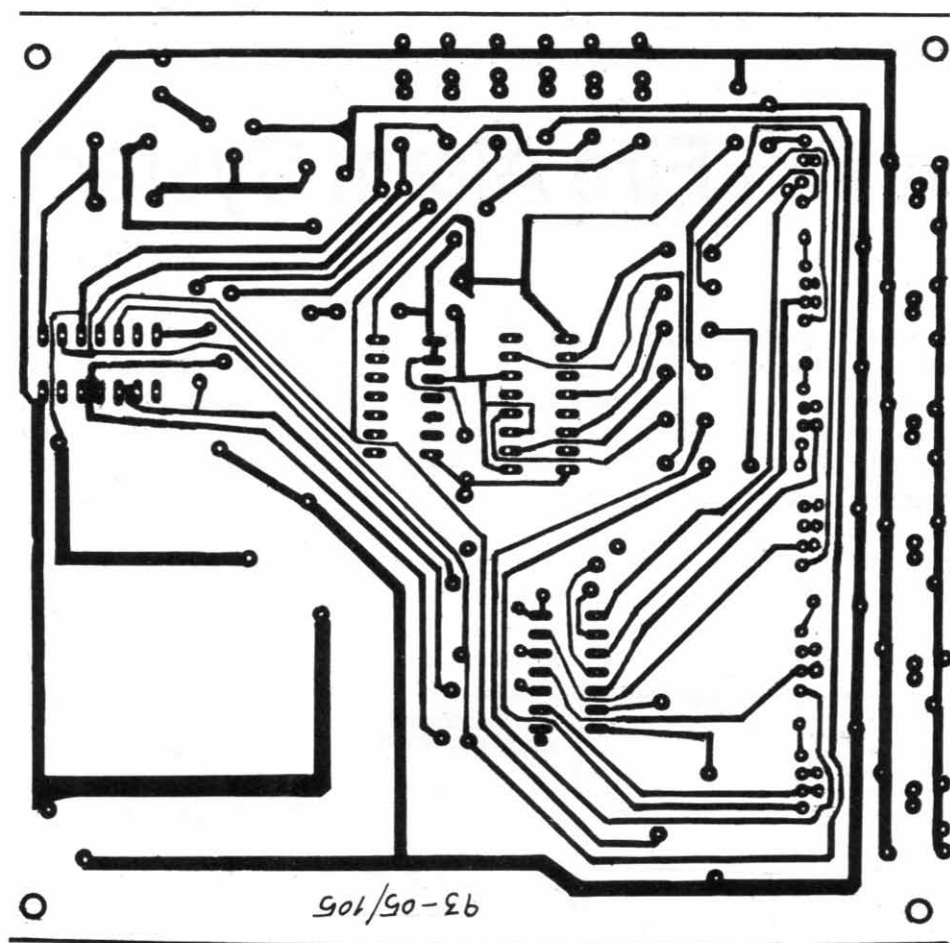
Actual-size PCB layout for the circuit shown in Fig. 1.
